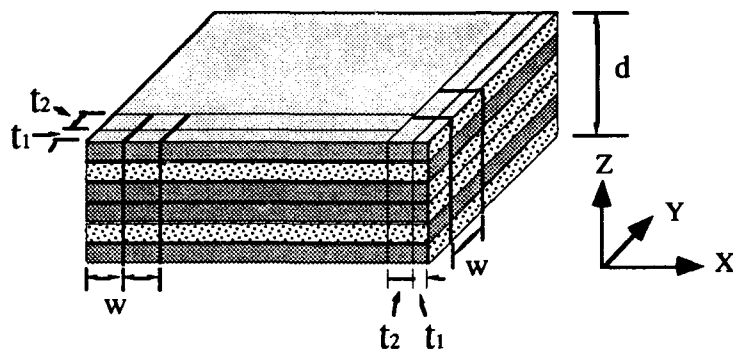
Representative cutting scheme of the Test Specimens out of the Composite Panel
